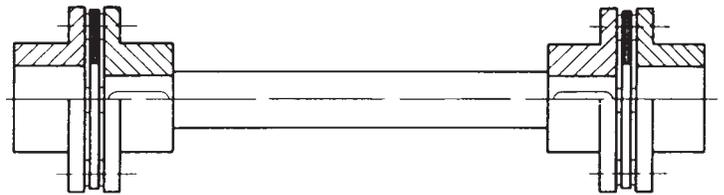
2-single flexing couplings with a solid intermediate shaft.
